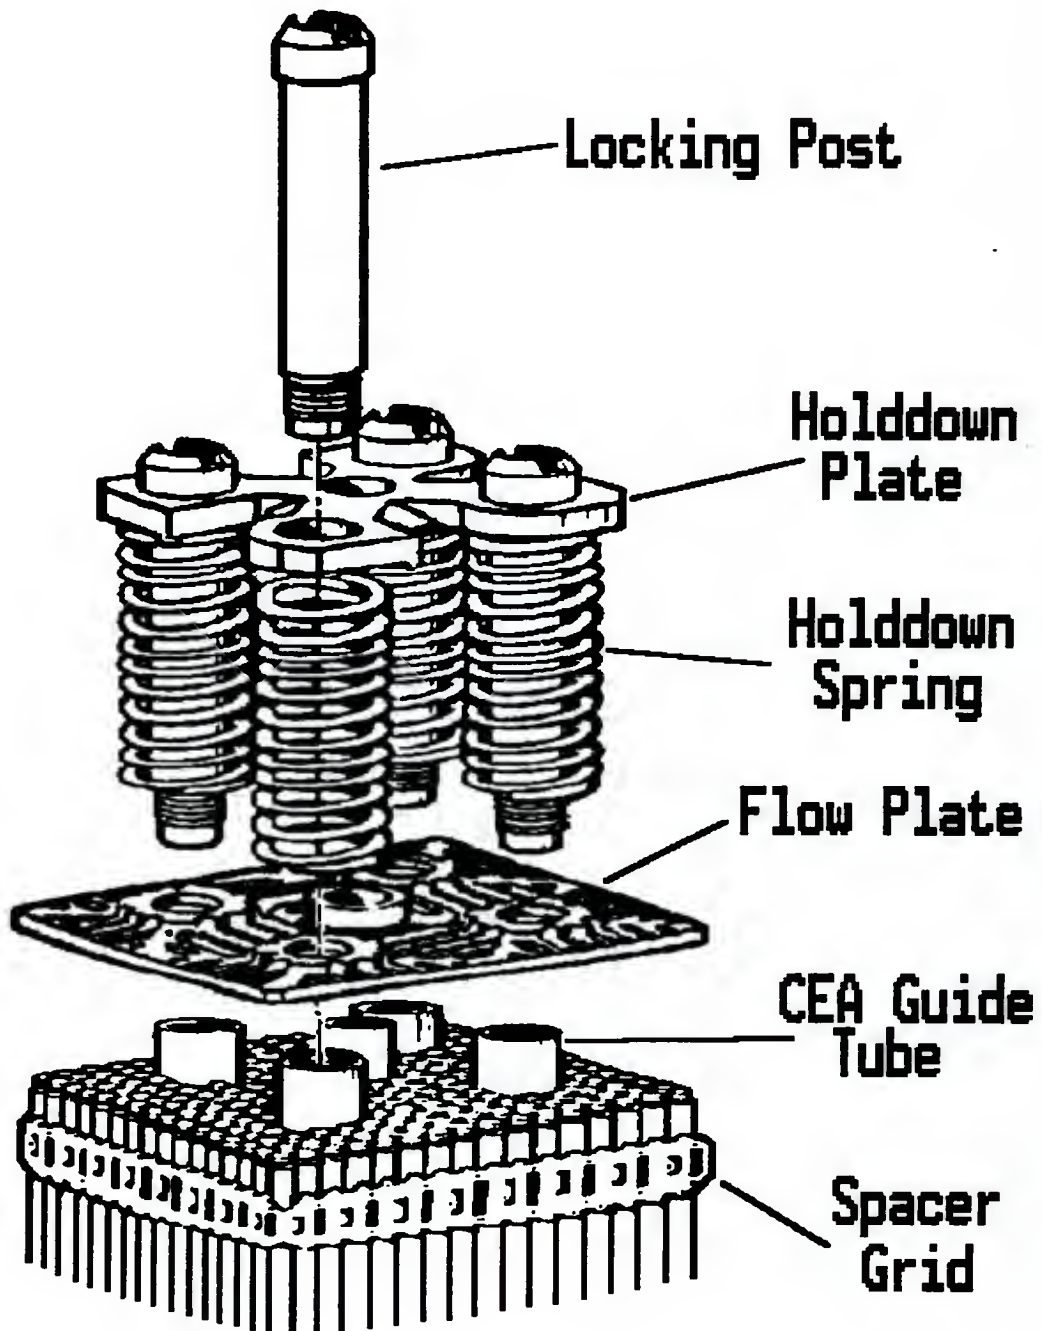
Exploded view of a Combustion Engineering Upper End Fitting on a PWR fuel assembly.
